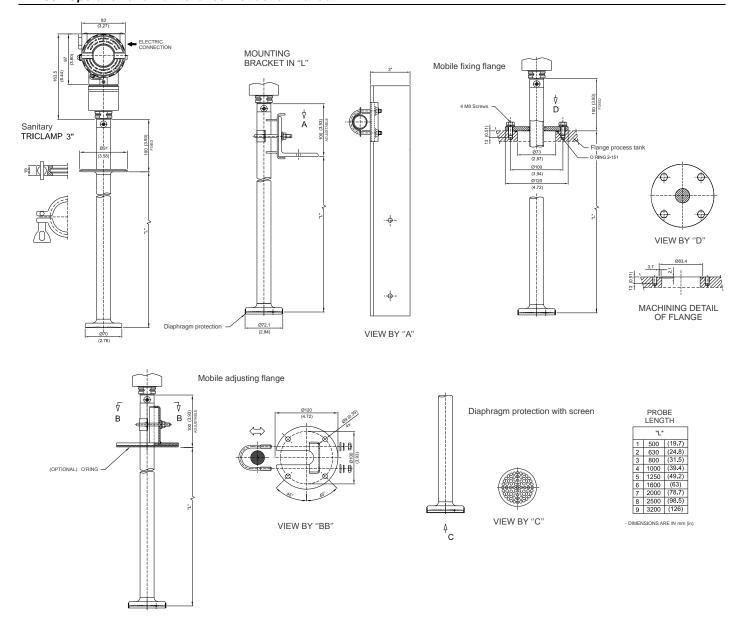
(e) - Dimensional Drawing and Mounting Position for LD293 – Level (Insertion)
